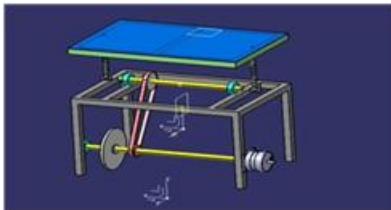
Exploded isometric view: spring-mounted plate (blue), belt drive (pink belt), coil springs, flywheel and generator shaft.
